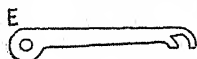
SWINGING BRIDGE PIECE TO OPEN OR CLOSE THE RESISTANCE.
